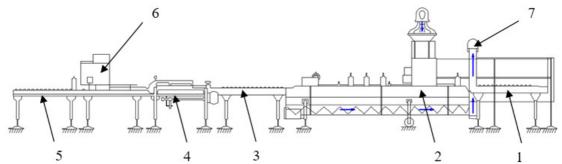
Overview of installation for filling pots with nutritive mix and simultaneous sowing: 1, 3, 5 – roller conveyor; 2 – installation with pot crates; 4 – planting machine; 6 – buffer bunker; 7 – inclined conveyor with scrapers
